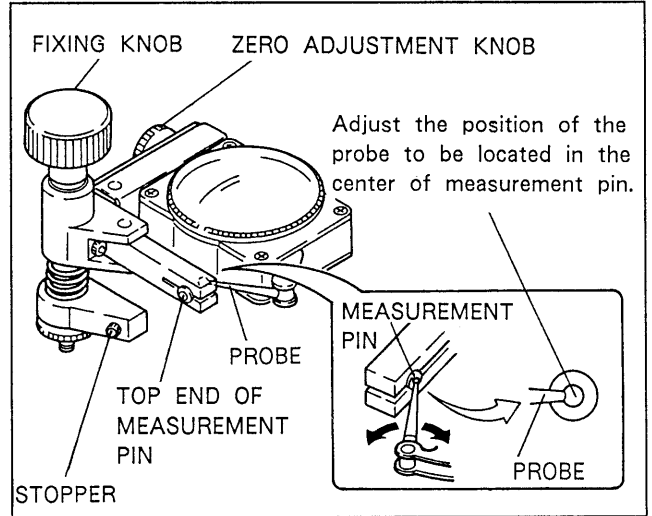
Upper Drum Eccentricity Adj. Gauge
